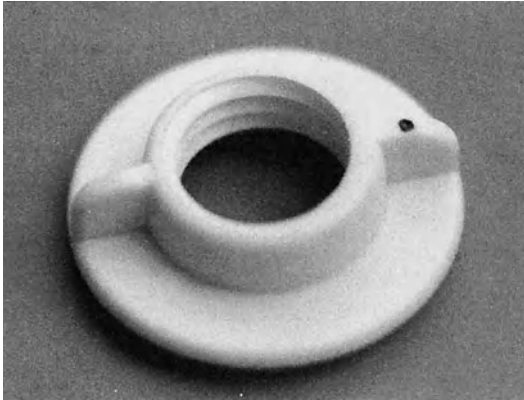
POM cap nut produced in a 4-cavity hot-runner mold
